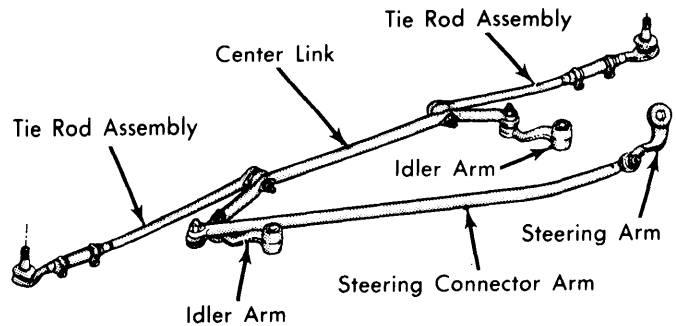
Disassembled View of Steering Linkage for "B" and "PB" Models
